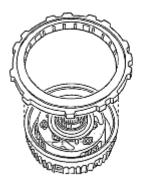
Identifying Rear Planetary Gear Component And One-Way Clutch Disassembly Components Courtesy of MAZDA MOTORS CORP.
